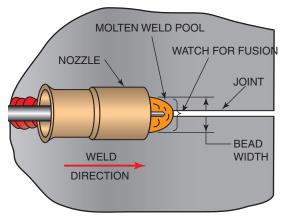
The shielding gas nozzle restricts the welder's view.
